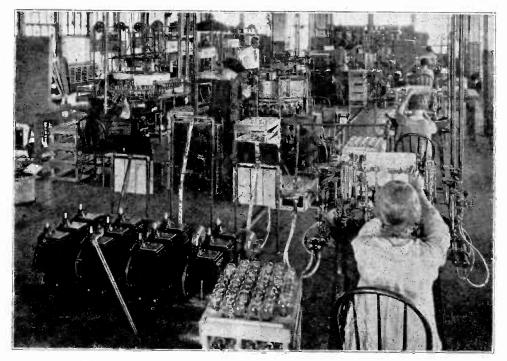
A corner of the exhausting, sealing and basing department of the Pilot tube factory.
